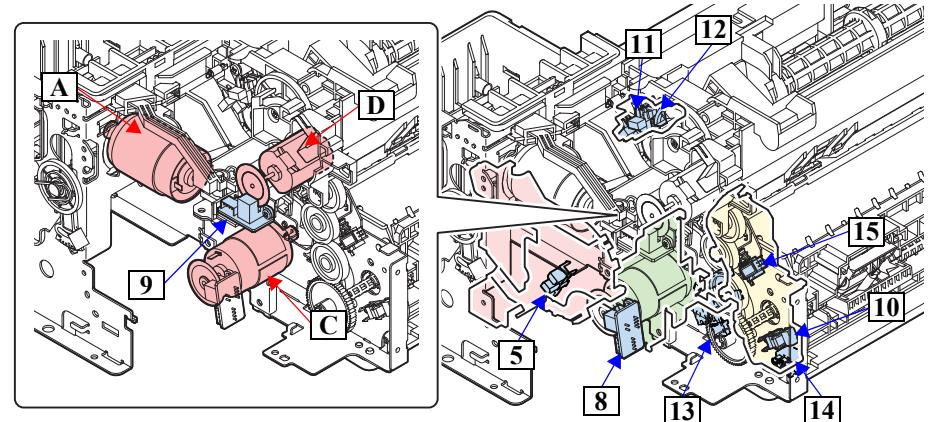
Motors & Sensors (rear of the printer mechanism)
